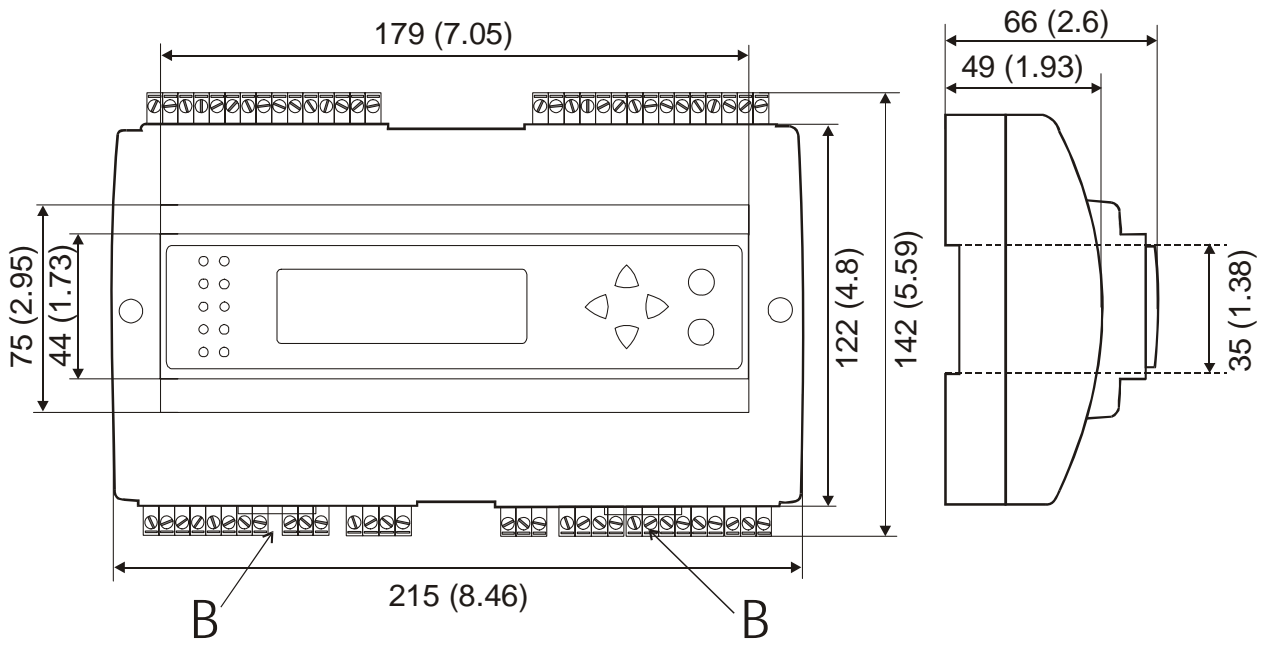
FX16 Master Controller Dimensions, mm (in.)
